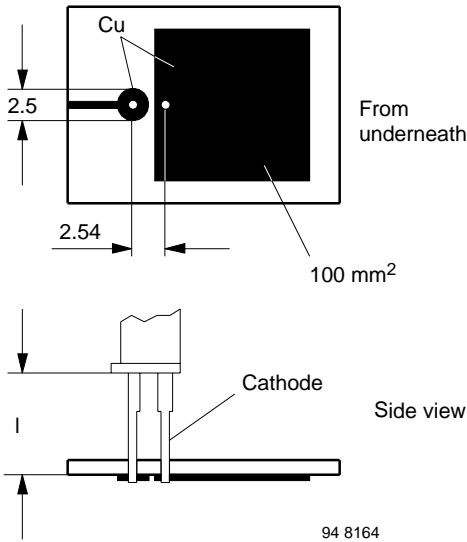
In the case of assembly on PC board with heatsink (curve a, figure 3)
